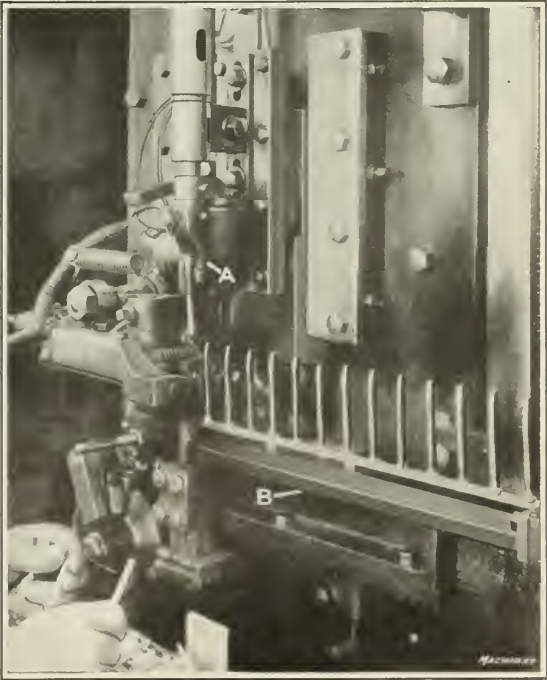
Semi-automatic Machine built by the National Electric Welder Co. for welding Garden Rakes
